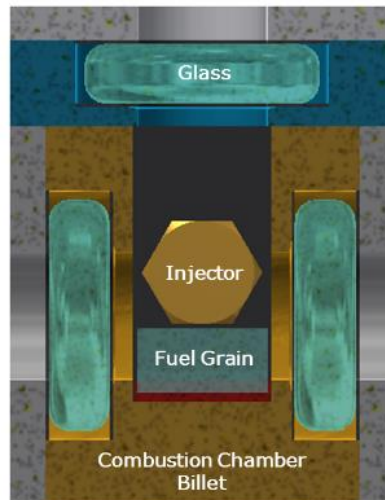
Combustion chamber section view final design (Theba, et al., 2017)
